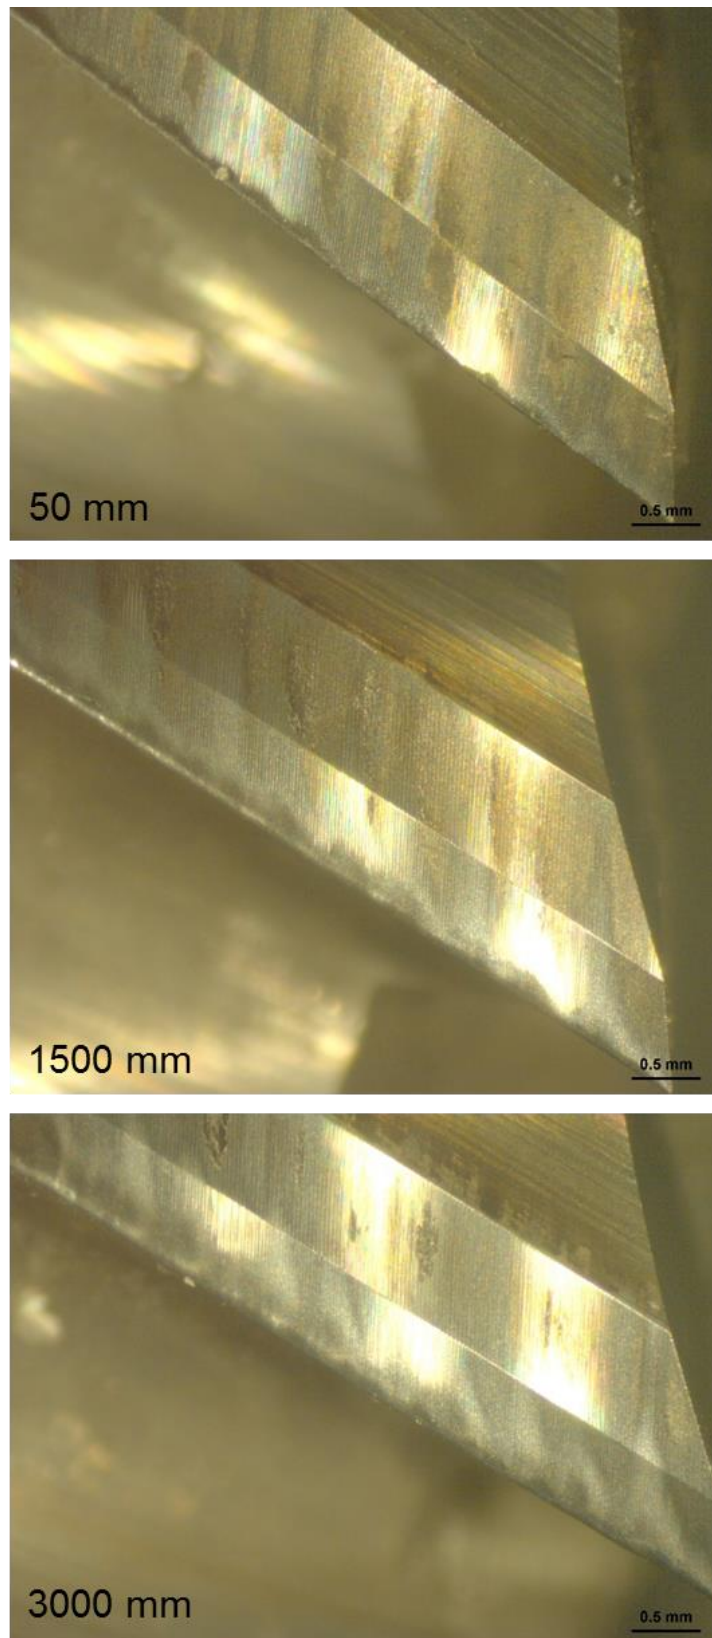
Microscopy images of tungsten carbide end mill used in UAM dry.
